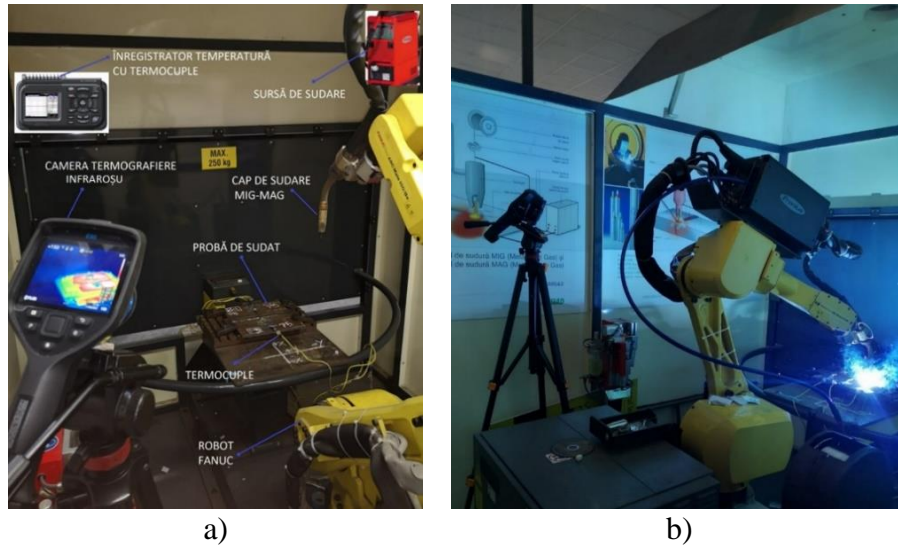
The experimental setup used for robotic MAG welding of the samples and for monitoring the welding process.
